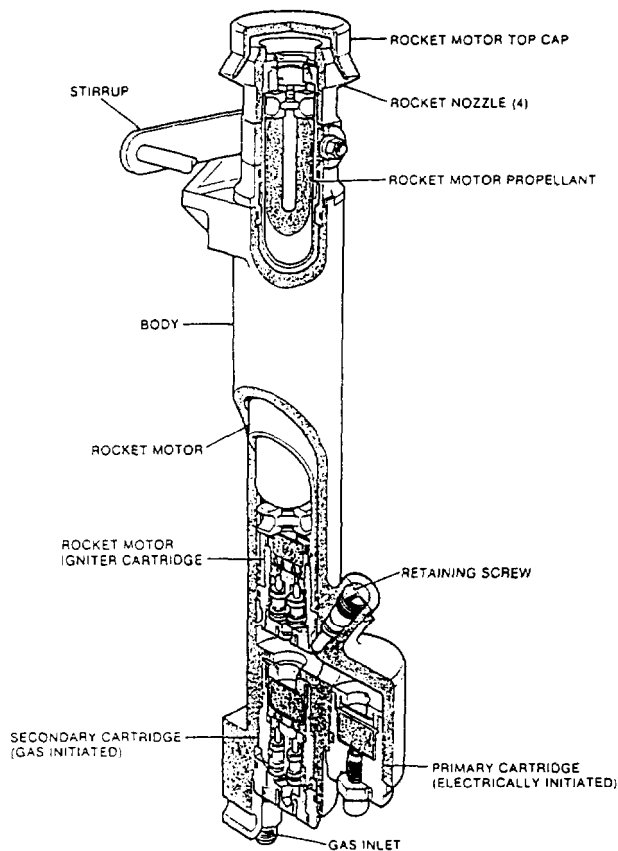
Parachute deployment rocket motor (Mk 122 Mod 0).
